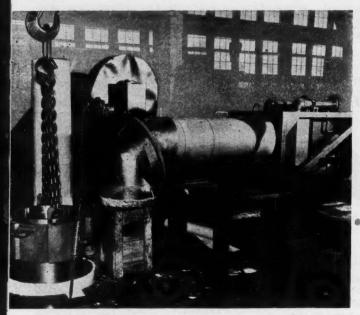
Bronze Tail-Shaft Liners are Expanded by Heating in a Vertical, Electrically-Heated Chamber
